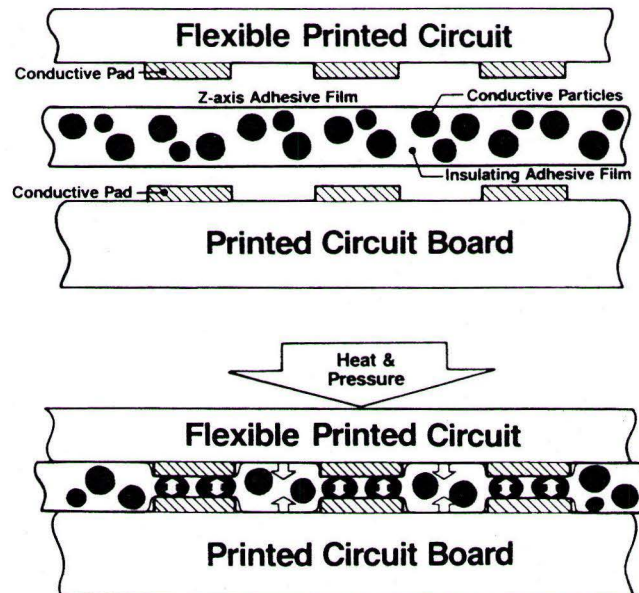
Principle of connections [Weld-Equip, 1994]
